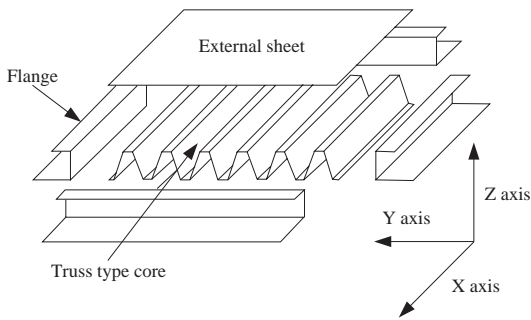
Schematic illustration of laser-welded stainless steel honeycomb panel
